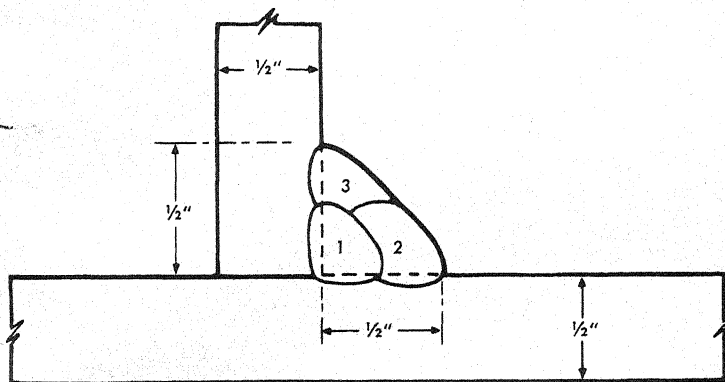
Fillet weld on T-joint in horizontal position.
